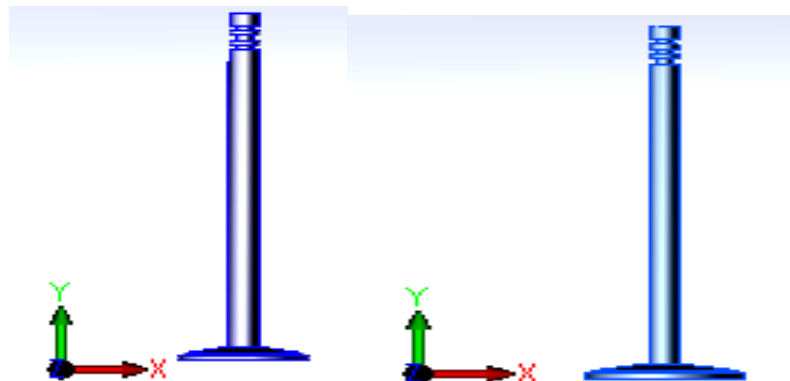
53 Three Dimensional Sketch of Intake and Exhaust Valve
